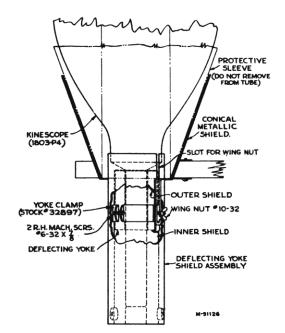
Assembly Details, Showing Kinescope and Deflecting Yoke Shielding
